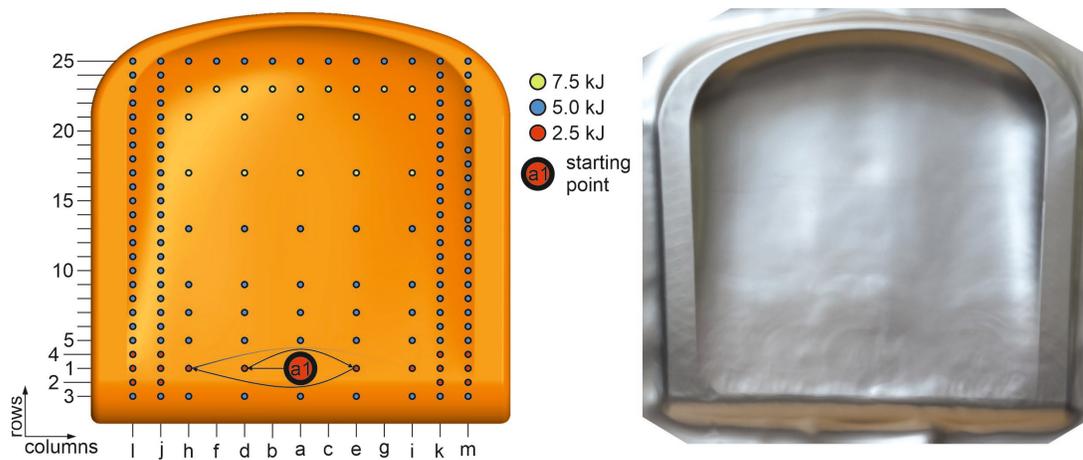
EMIF forming strategy (left) and resulting workpiece (right)
